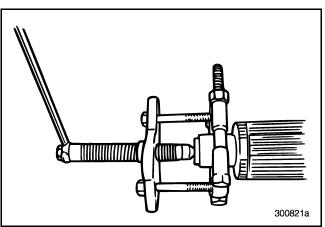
Removing Rear Spigot Bearing Inner Race (T313L/T318L Shown)
